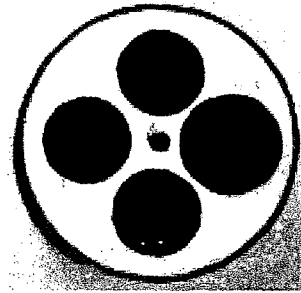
A side view of the multi-hole container with difference of hole diameter.
